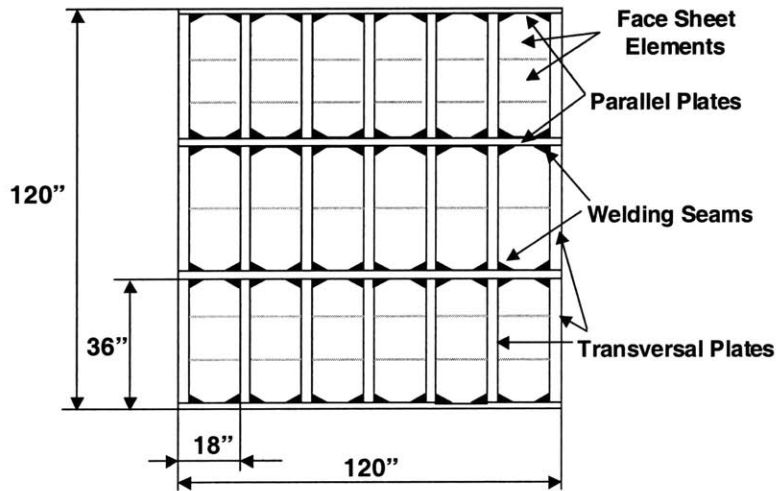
Autoclave Tool for Engine Cauling [29]
